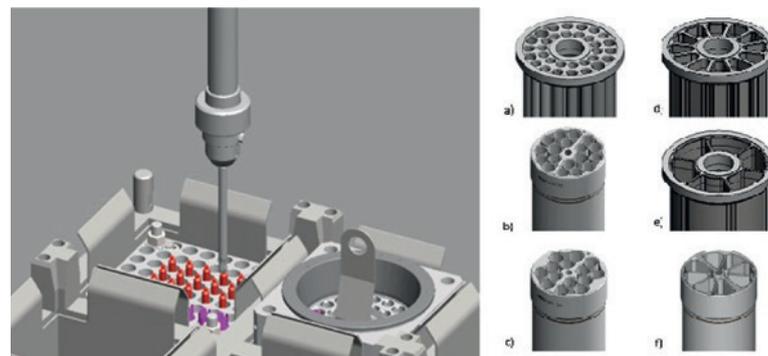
Damaged fuel rods and handling tubes with fuel rod sections are placed in a receptacle, which is positioned in the fuel assembly storage rack. Next to that the quiver is waiting for the loading (left). Different internal baskets for varying kinds of bent damaged fuel rods (right).
